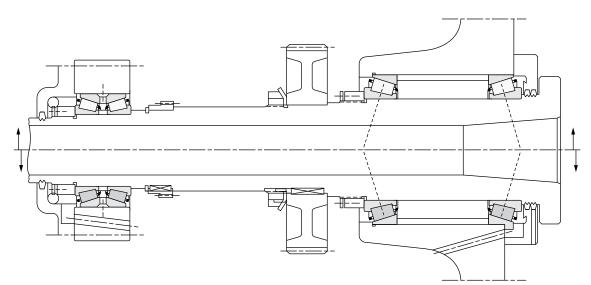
"Box-type" mounting with a TDO at the floating position.
